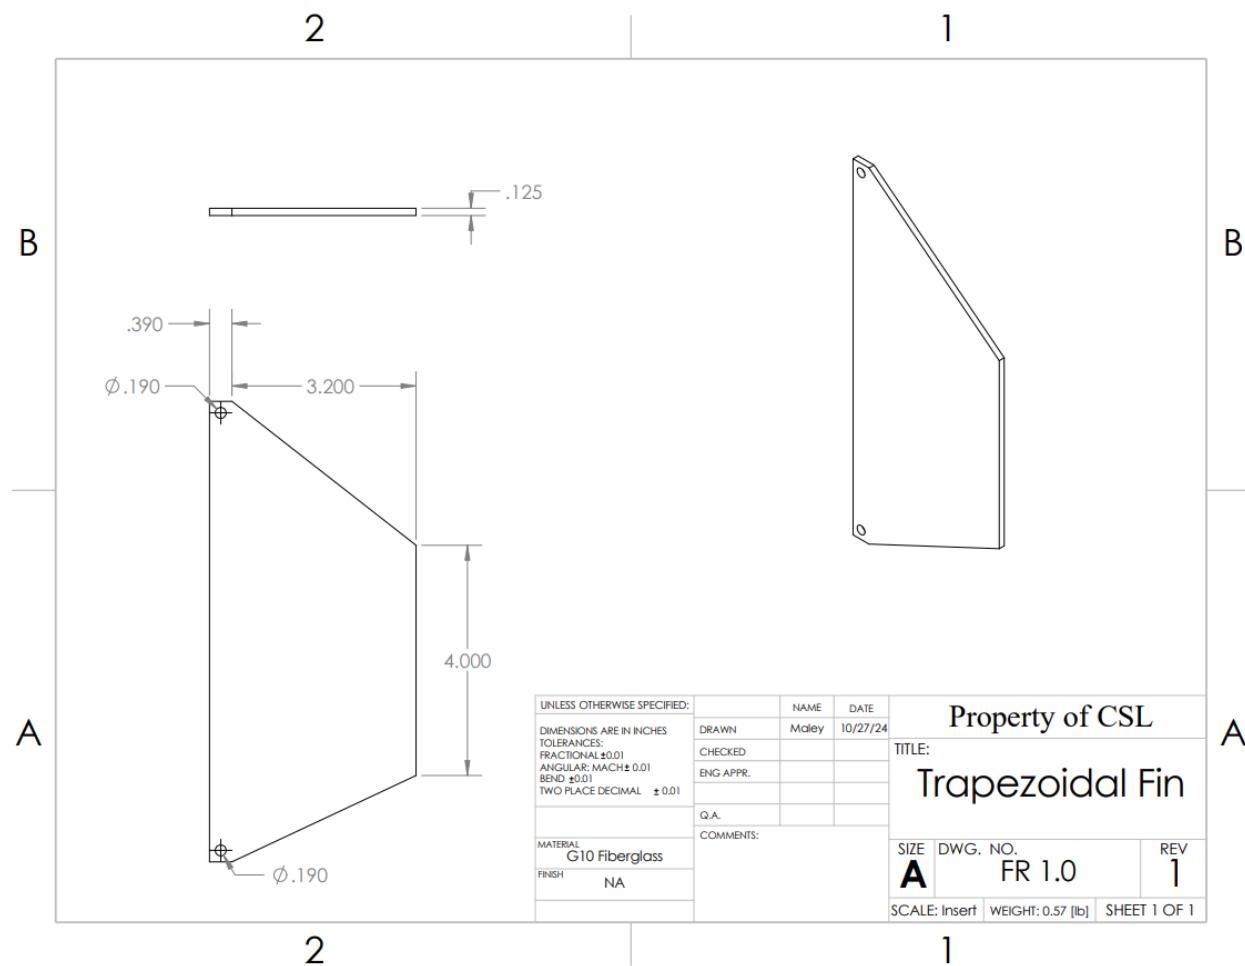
SolidWorks drawing for Trapezoidal Fin.
